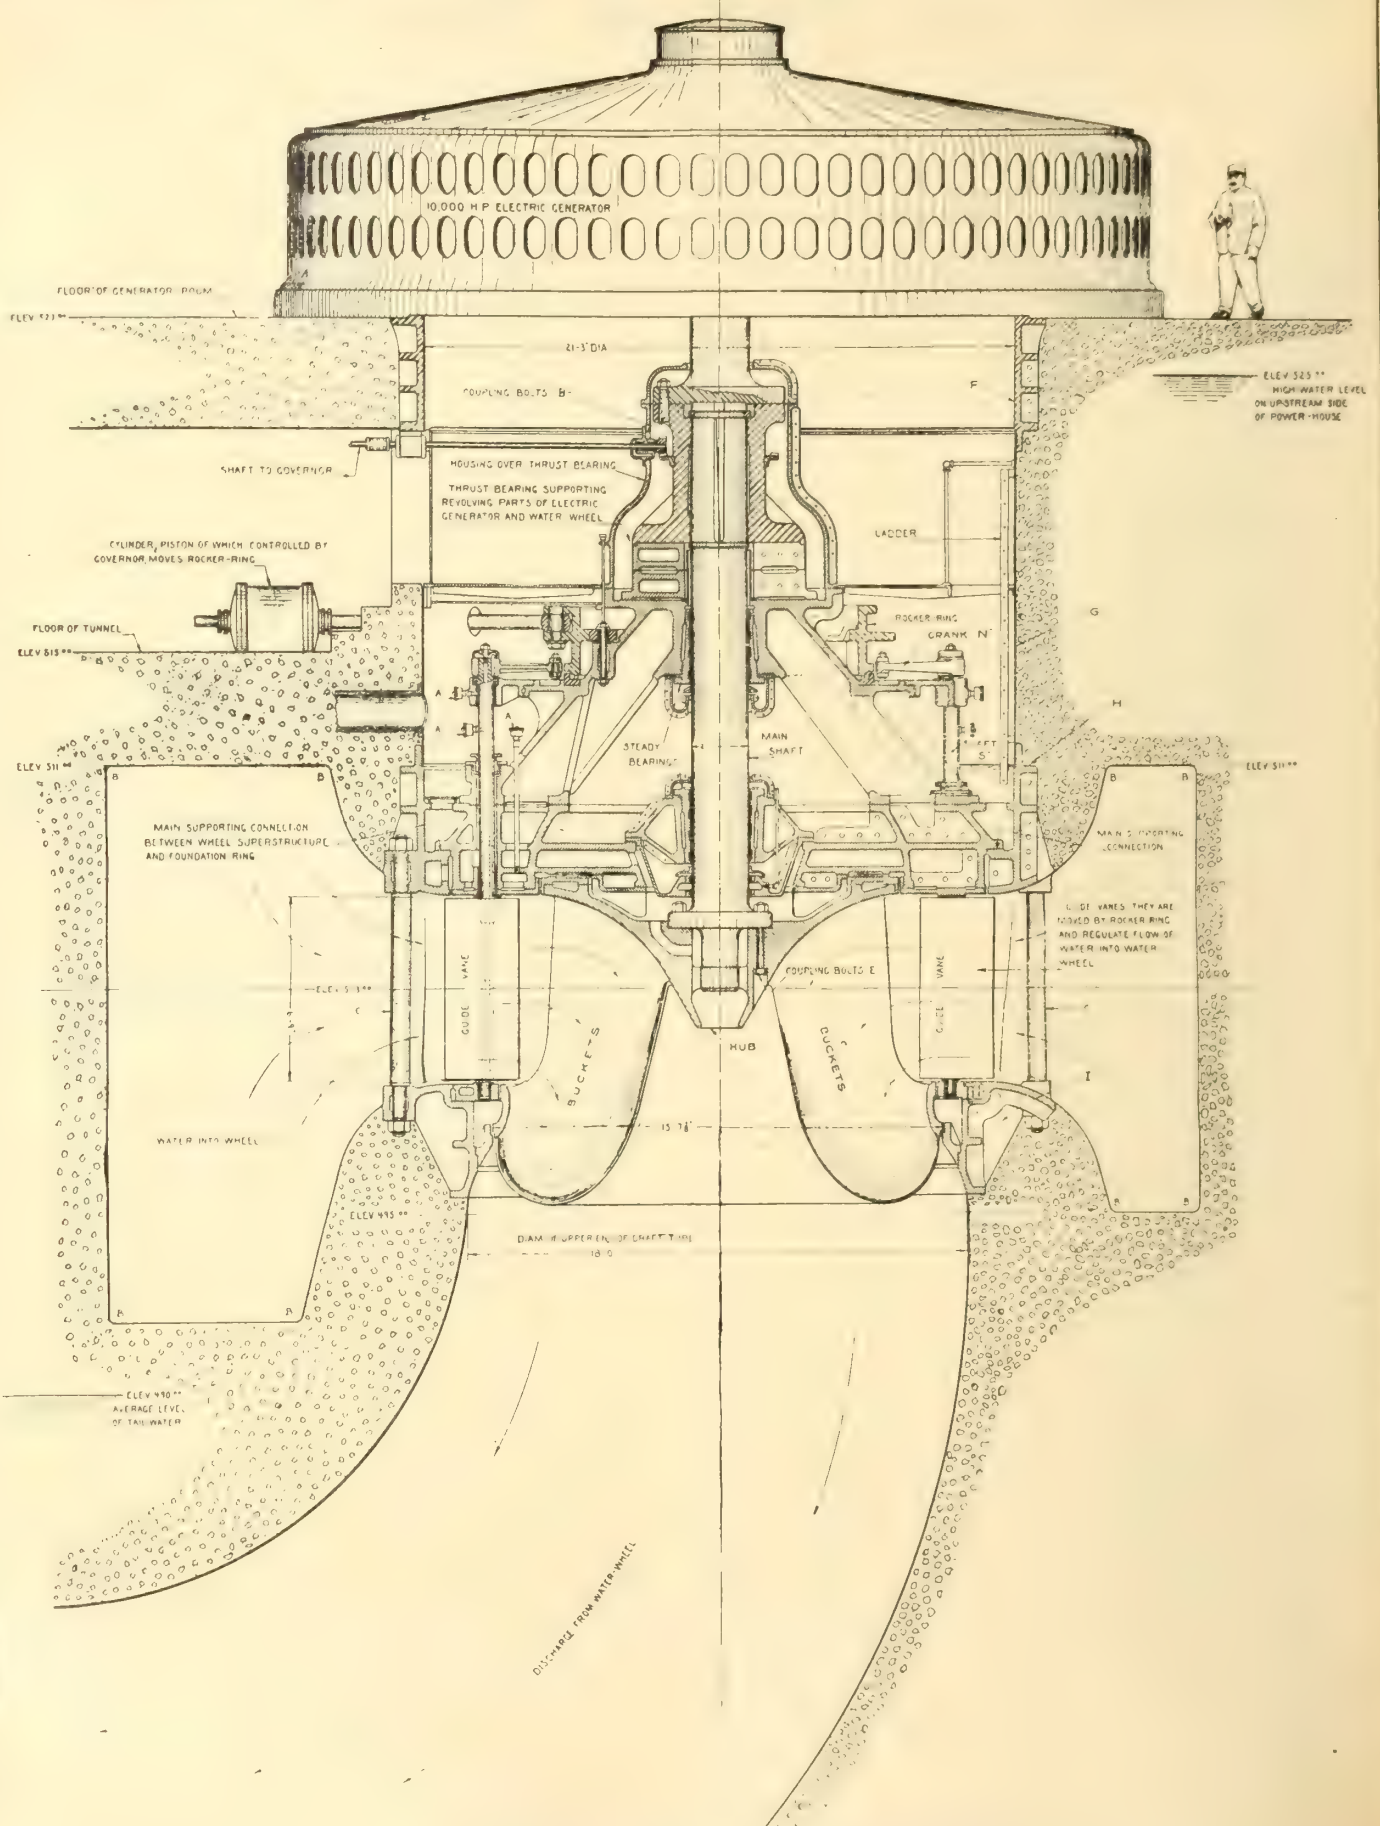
Cross-sectional design of turbo-generator equipment on Mississippi River
